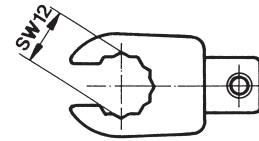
SW12 fork wrench insert for mounting and torque wrench Type 1300A13
